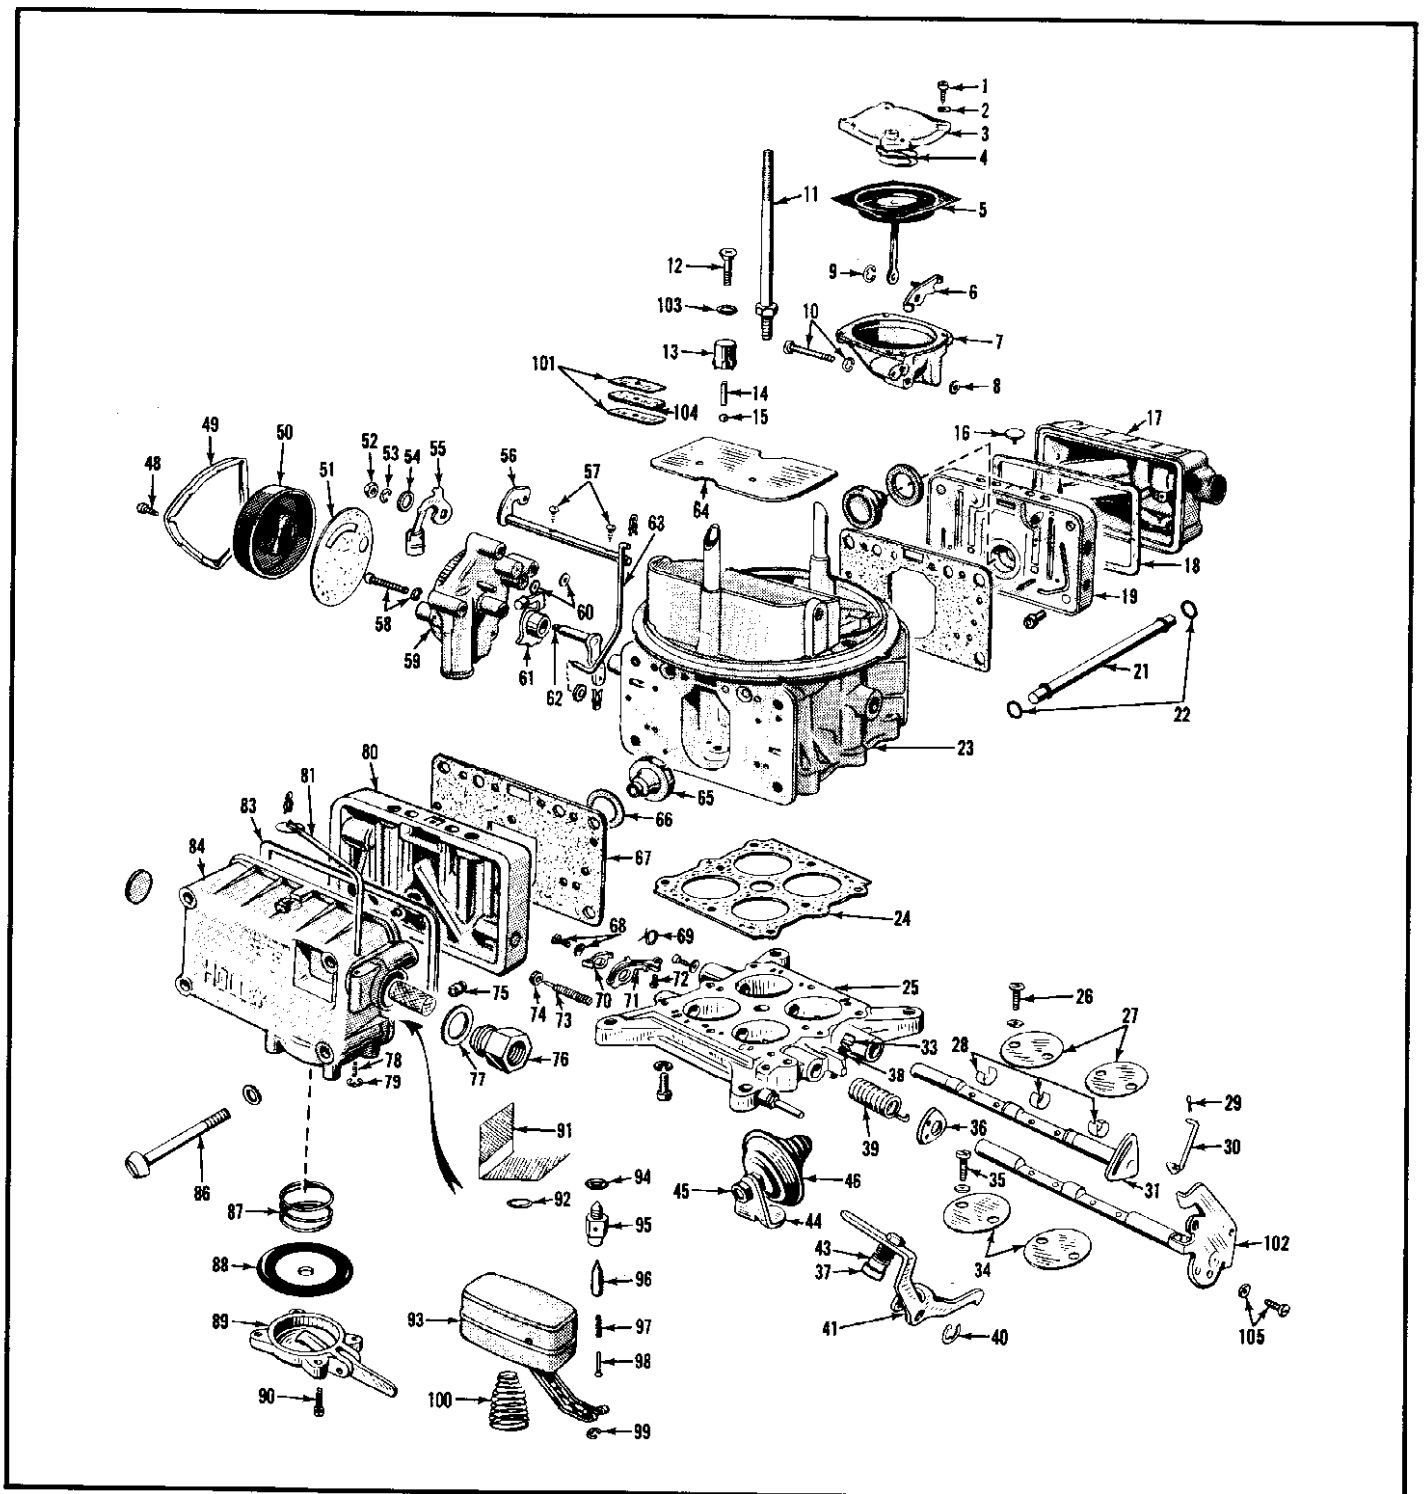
D-21—Holley Model 4150 Carburetor — Disassembled
